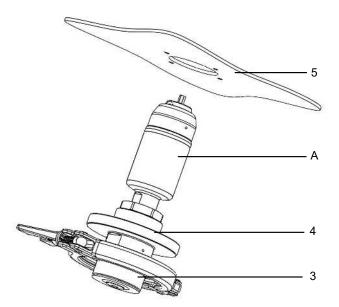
Assembling the pneumatic stainless steel actuator in the housing
